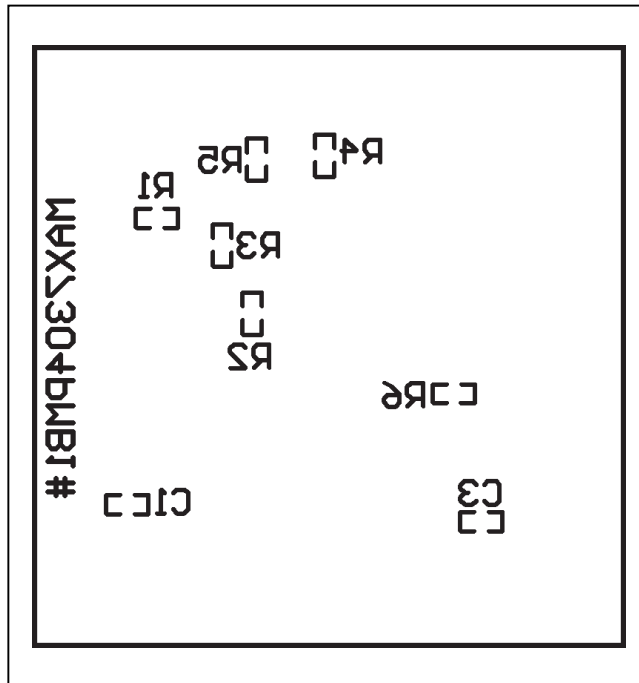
MAX7304PMB1 Peripheral Module Component Placement Guide—Solder Side
